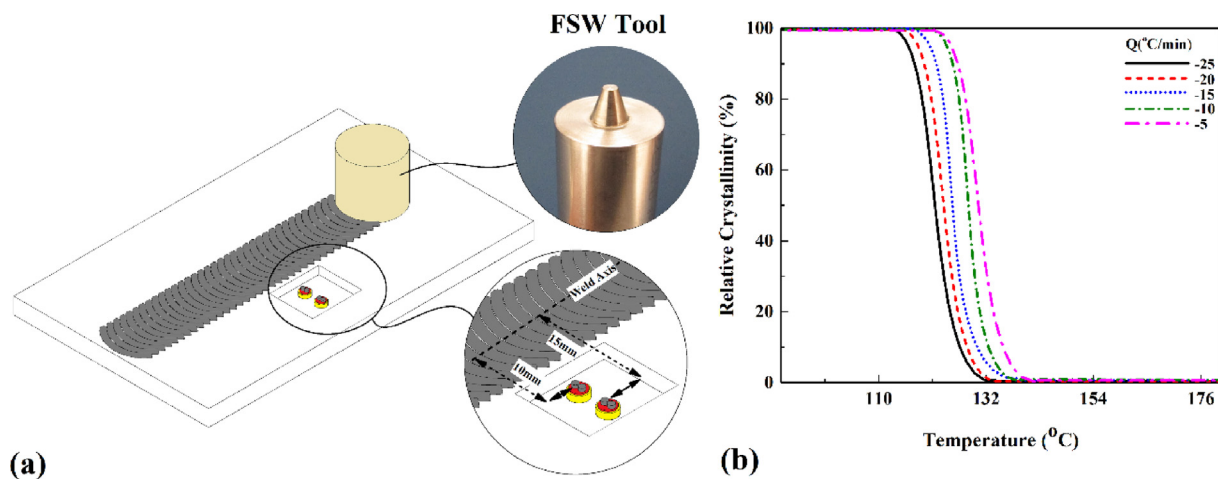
(a) Used FSJ tool and thermocouples places, (b) Crystallinity of PP.
